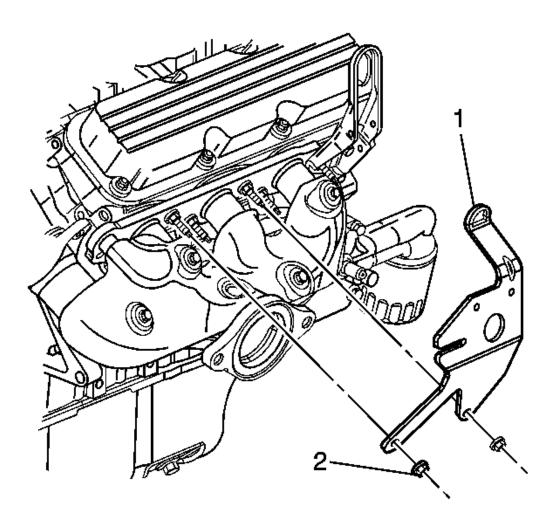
Fuel Injector Sight Shield Bracket & Nuts Courtesy of GENERAL MOTORS CORP.
